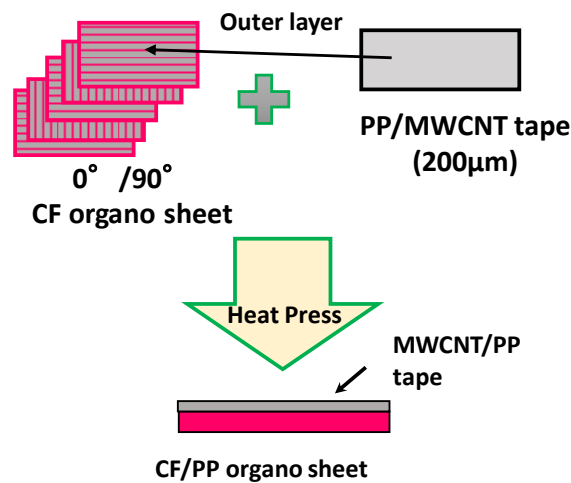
Overview of fabrication process of insert parts (CNT/CF/PP).
